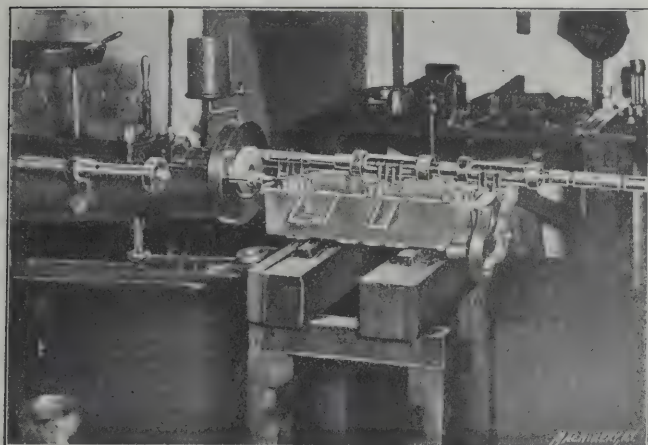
Special Broach for Broaching Crank-shaft Bearings after they are Reamed
